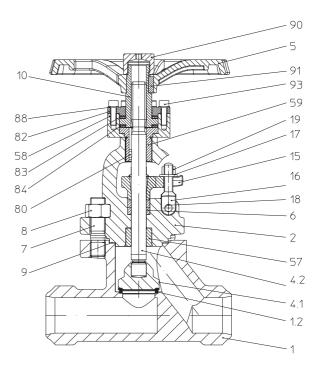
STOBU staight through with butt weld ends DN10-50 with non-rising handwheel
